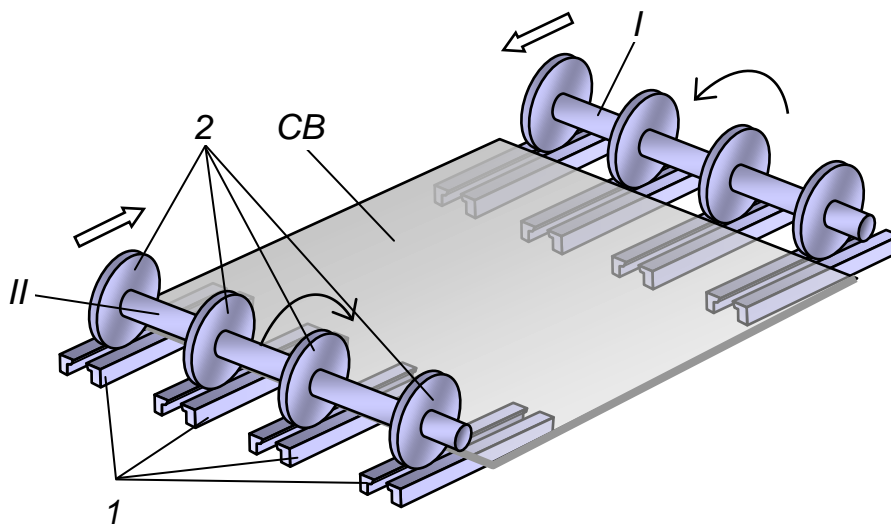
Scheme of devise for manufacturing of large-sized cut-outs made of corrugated fibreboard by movable cutting disk
